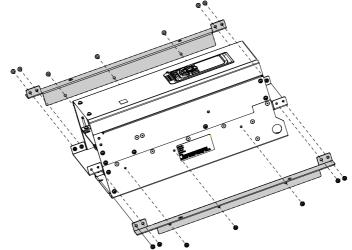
Installing the mounting brackets to the AC drive (T1 to T9 models)
